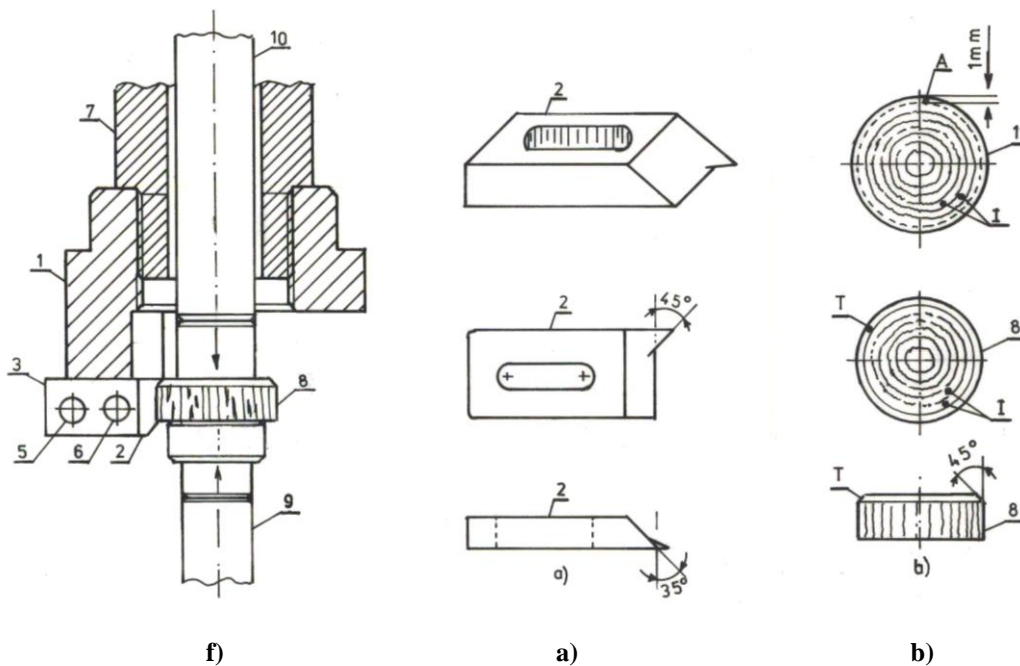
Section view (f) of the milling cutter together with the fixation and vertical displacement system of the wooden rough discs and the final correction plugs. 1-cylindrical body, 2- shaped knife, 3-support, 4-press plate, 5,6-bolt clamp, 7-drive shaft, 8- finished plug, 9,10-rods, T-bevel. The geometrical characteristics of the milling knife(b). Geometry of rough discs and finishes plugs(c). 2- profiled knife, 8- finished plugs, 11- raw wooden disc, A-processing addition, T-bevel, I-rings
